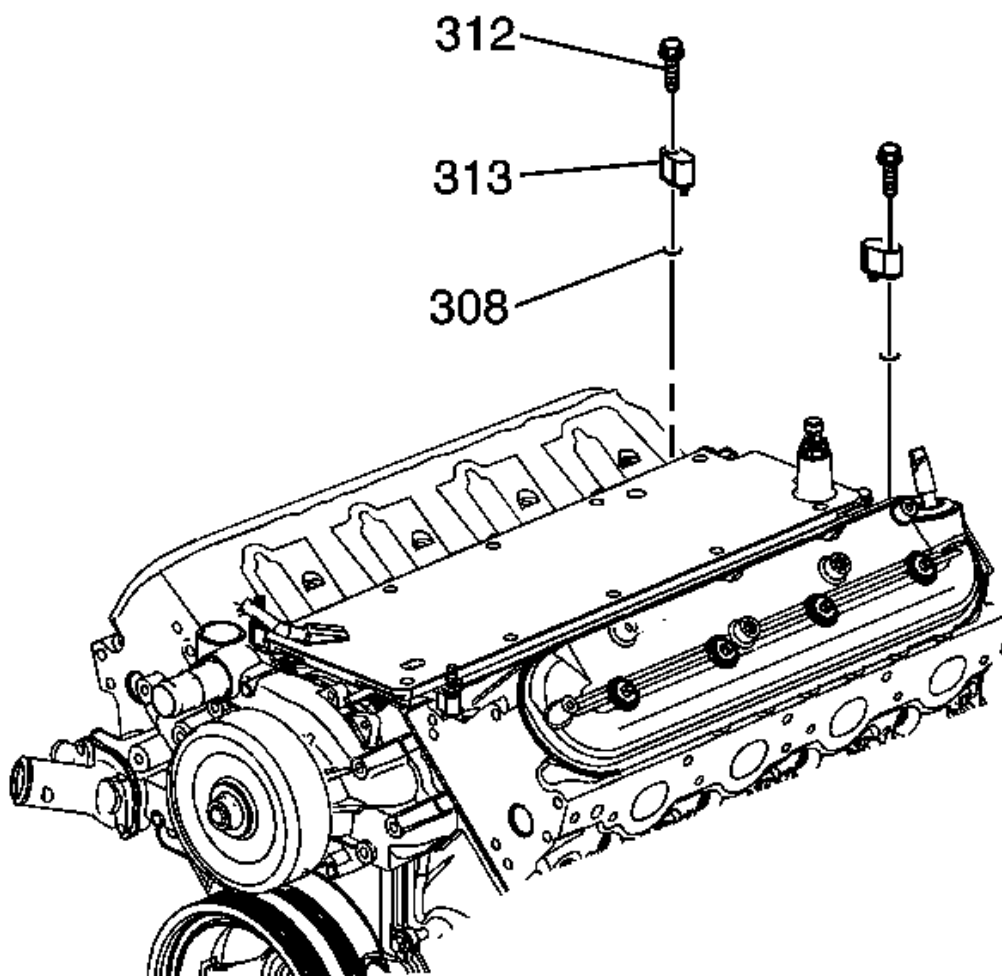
View Of Coolant Air Bleed Pipe Covers & Gaskets
